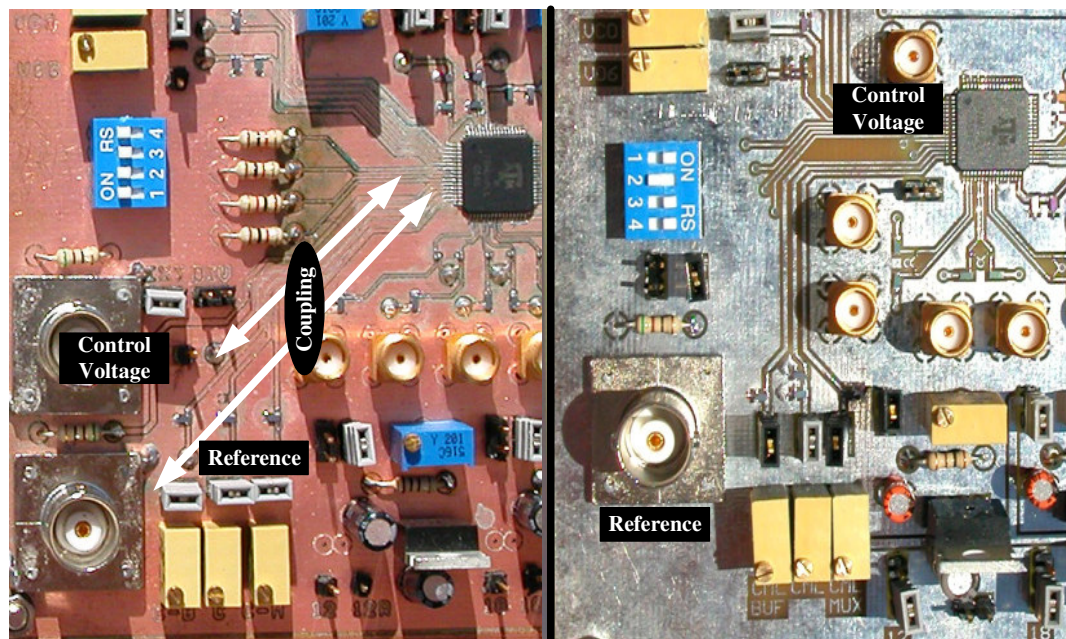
(a) Coupling in the PCB to the Control Voltage of the VCO (b) Refinement in PCB #5
